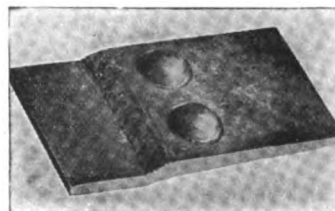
J. WELDING IN PLACE OF CALKING. Speed of work depends on amount of metal added. Strength of joint may be raised 25% doing the work at three times the welding speed given in table, for any thickness plate above  $\frac{1}{4}$ ". This makes a single riveted joint equivalent to a double riveted joint and makes a double riveted joint as strong as the original plate. Joints welded in this manner stand much abuse without leaking.
